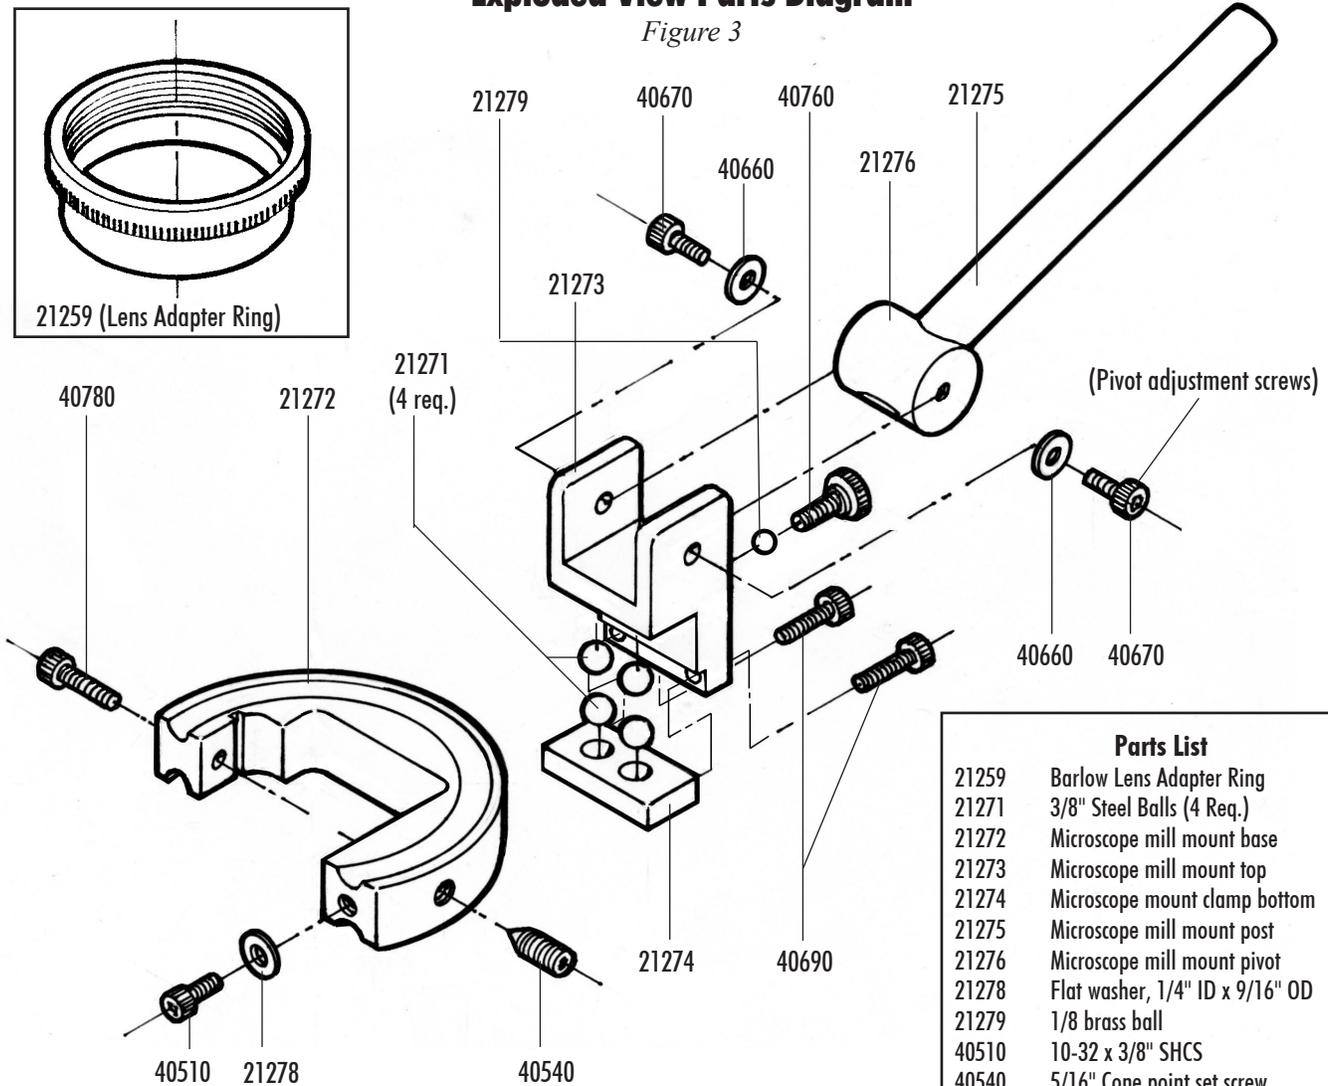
Component parts of the microscope when mounted to a Sherline mill.
